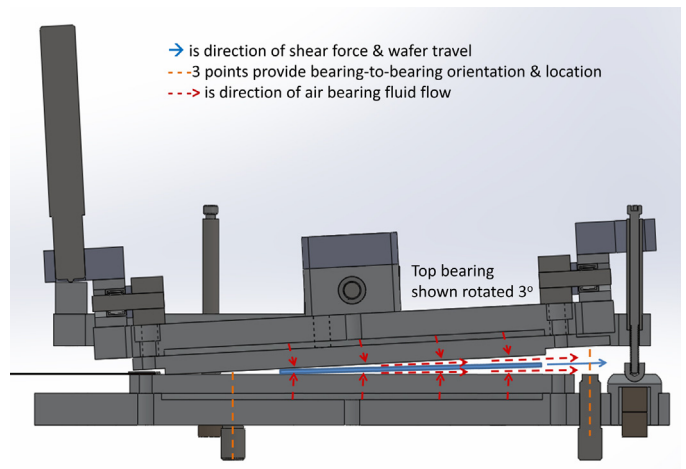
Cross-sectional view of the device illustrating rotation of the top bearing to impart a shear force.
